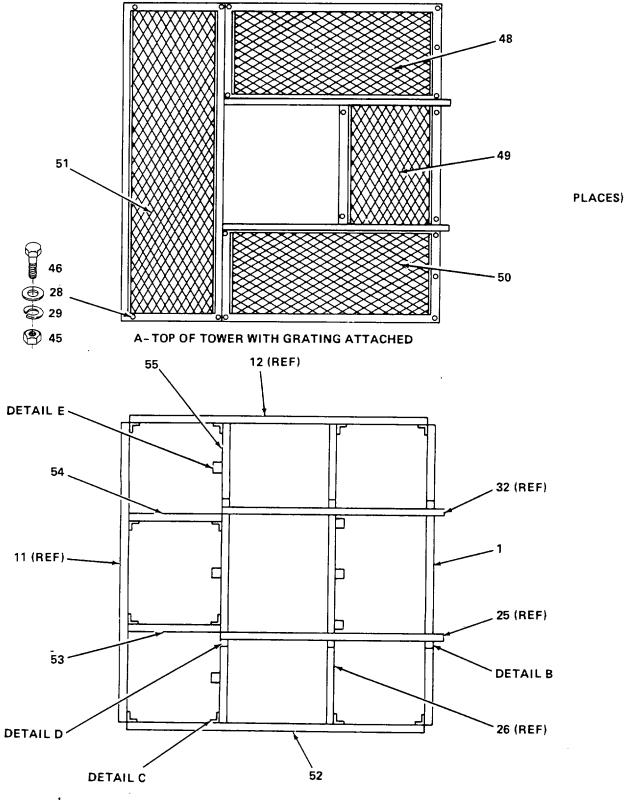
Tower Assembly Kit (Sheet 3 of 6)
